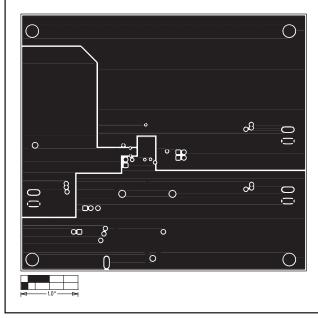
MAX5888 EV Kit PC Board Layout—Ground Planes
